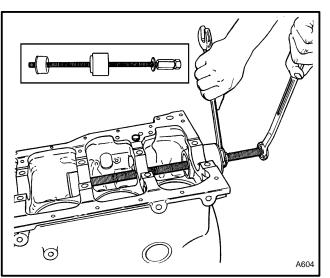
CAMSHAFT BEARINGS, REMOVAL AND INSTALLATION
